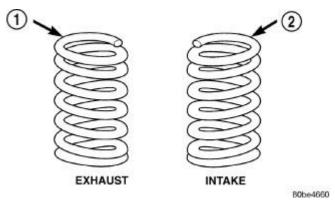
Valve Spring Identification Courtesy of CHRYSLER LLC
